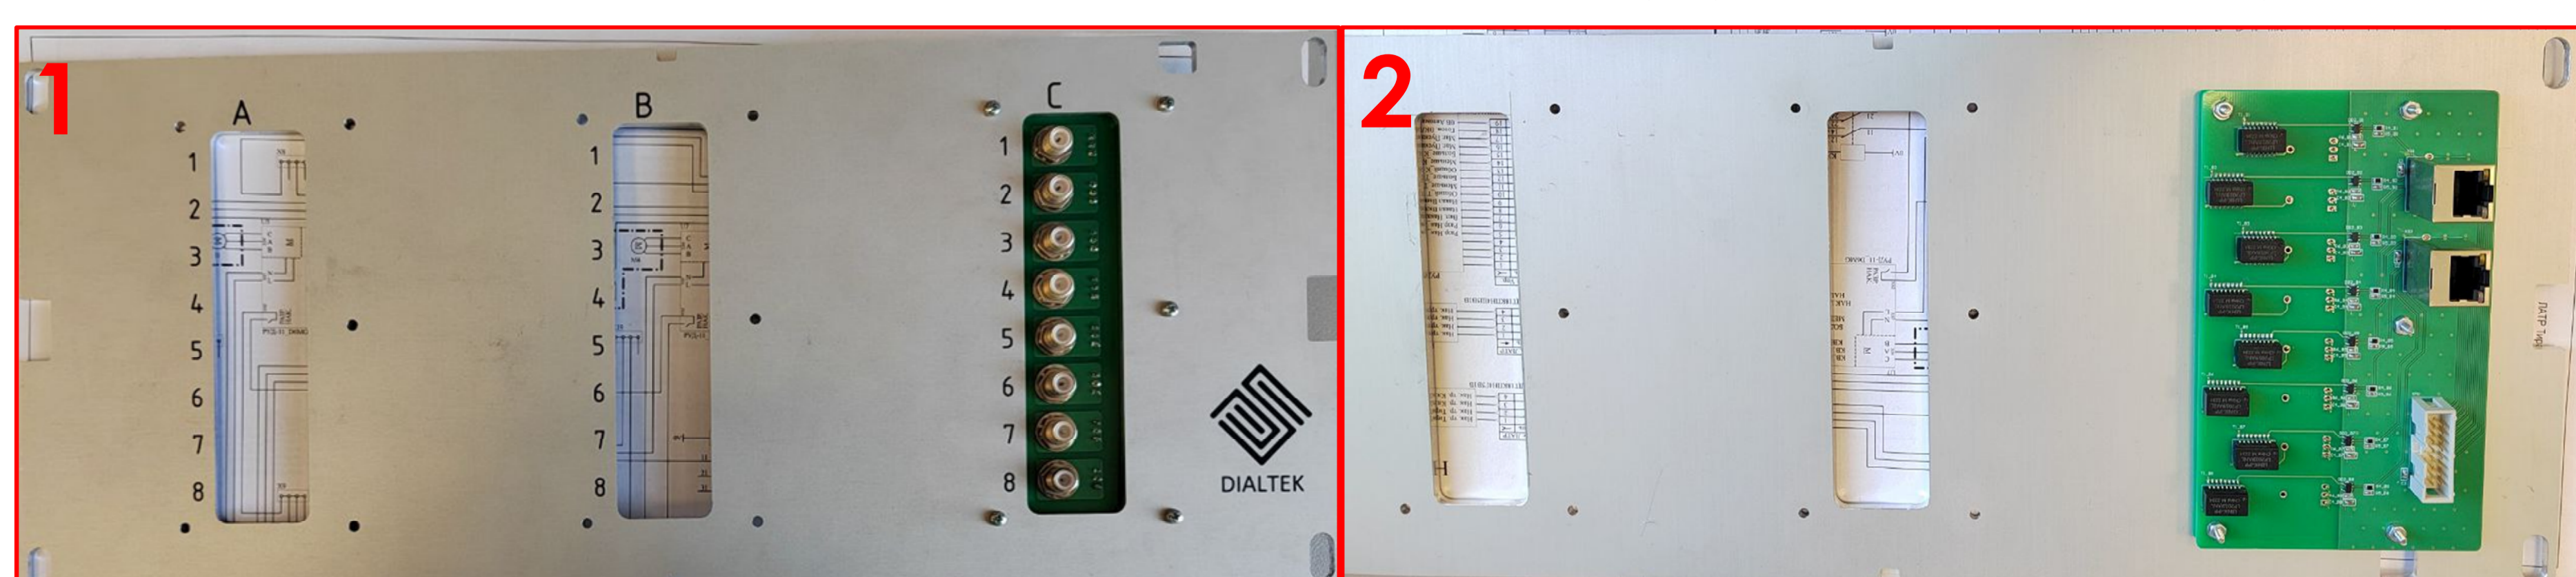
Adapter panel during assembly. 1 – front side, 2 – reverse side.
